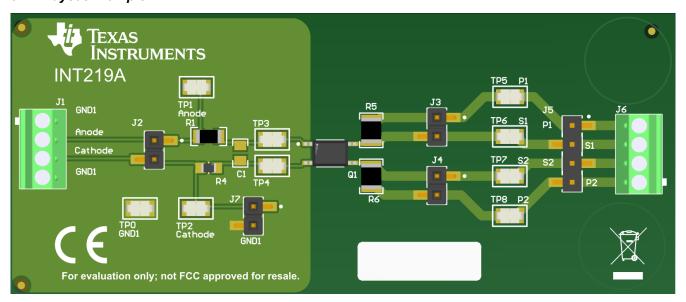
Layout Example of ISOM8600 With a 2-Layer Board
